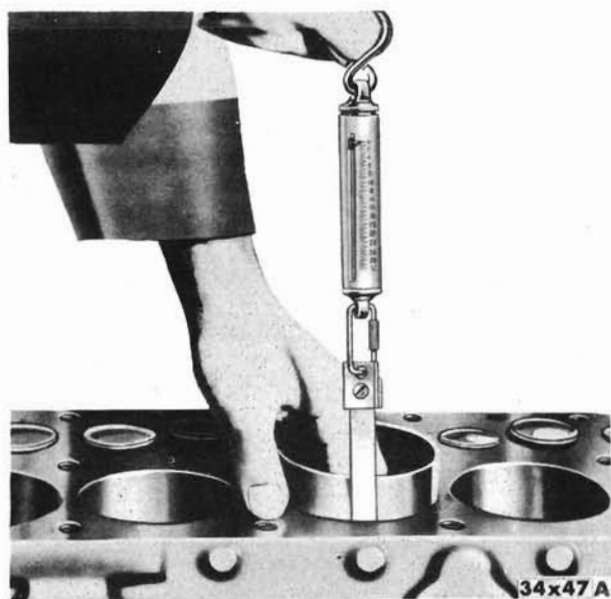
Fitting Piston Using Spring Scale Tool C-690
